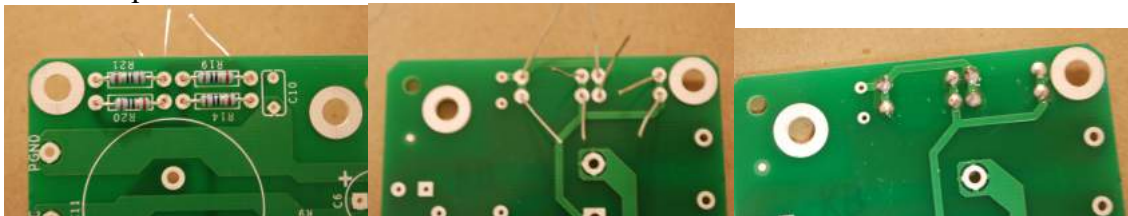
First four resistors are installed, leads bent on the back side, soldered, then clipped.
